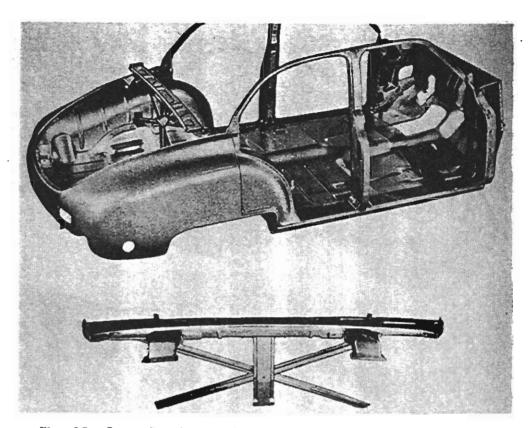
Cross-Bracing at the Trunk Compartment Is Welded to the Seat Back Shelf and to the Floor Pan.
